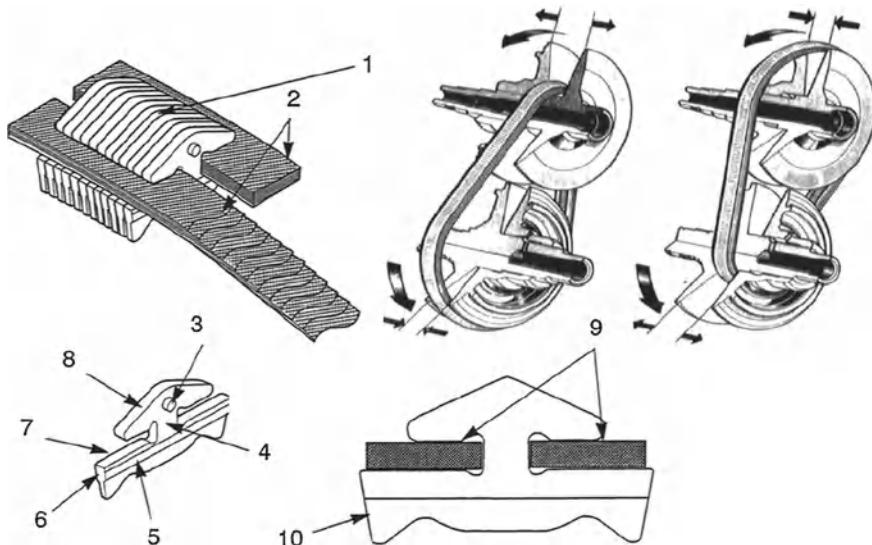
Detail of the pulley motion in a Van Doorne steel belt CVT (*upper part*); detail of the belt (*lower side*). The torque is transmitted by belt compression (from Genta and Morello 2009)
